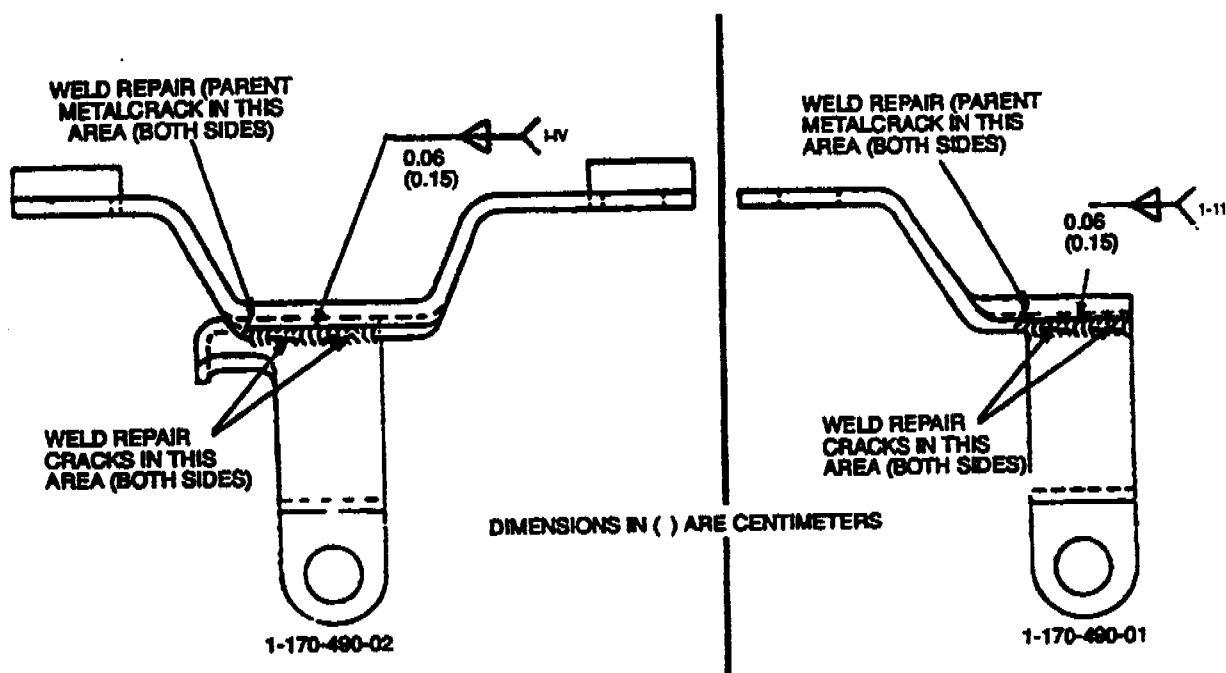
Bracket and Clamp Assembly - Weld Repair.
